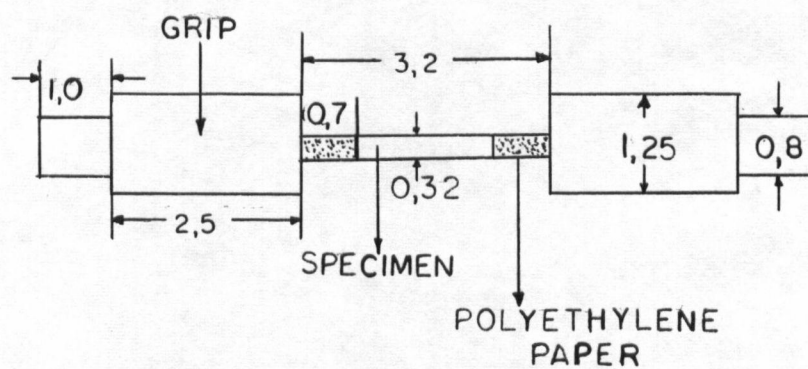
Dimensions of Mounted Crystal. (Unit: cm)
